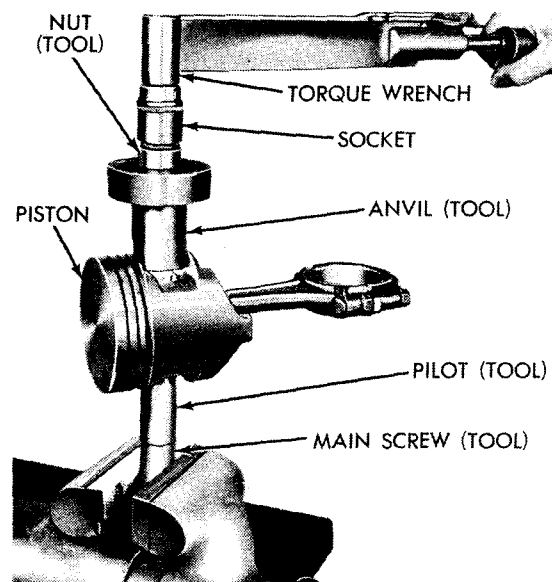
Testing Piston Pin Fit in Connecting Rod
